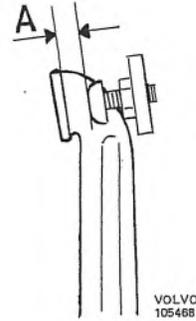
Clearance between lock handle control lever and door lock lever
